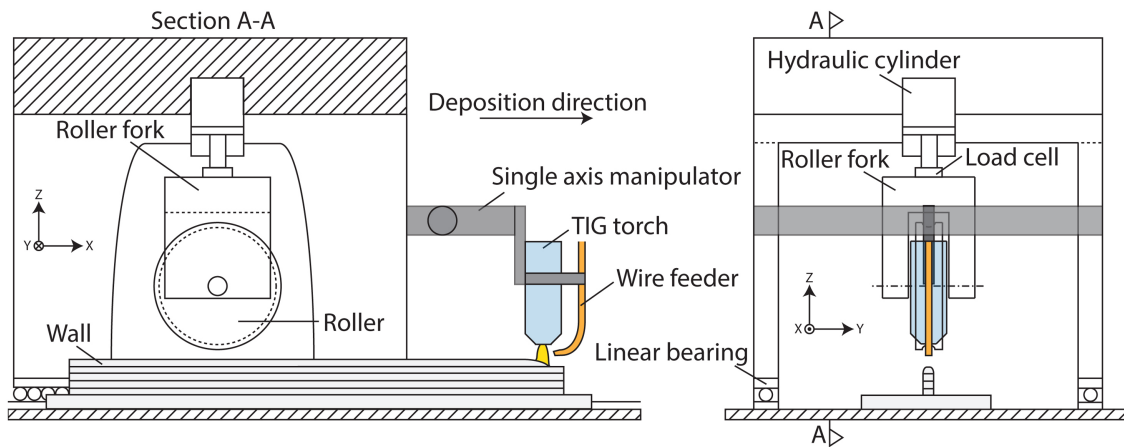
Diagram of automated welding equipment used in WAAM, as used to fabricate the specimens analysed in this study [31].
